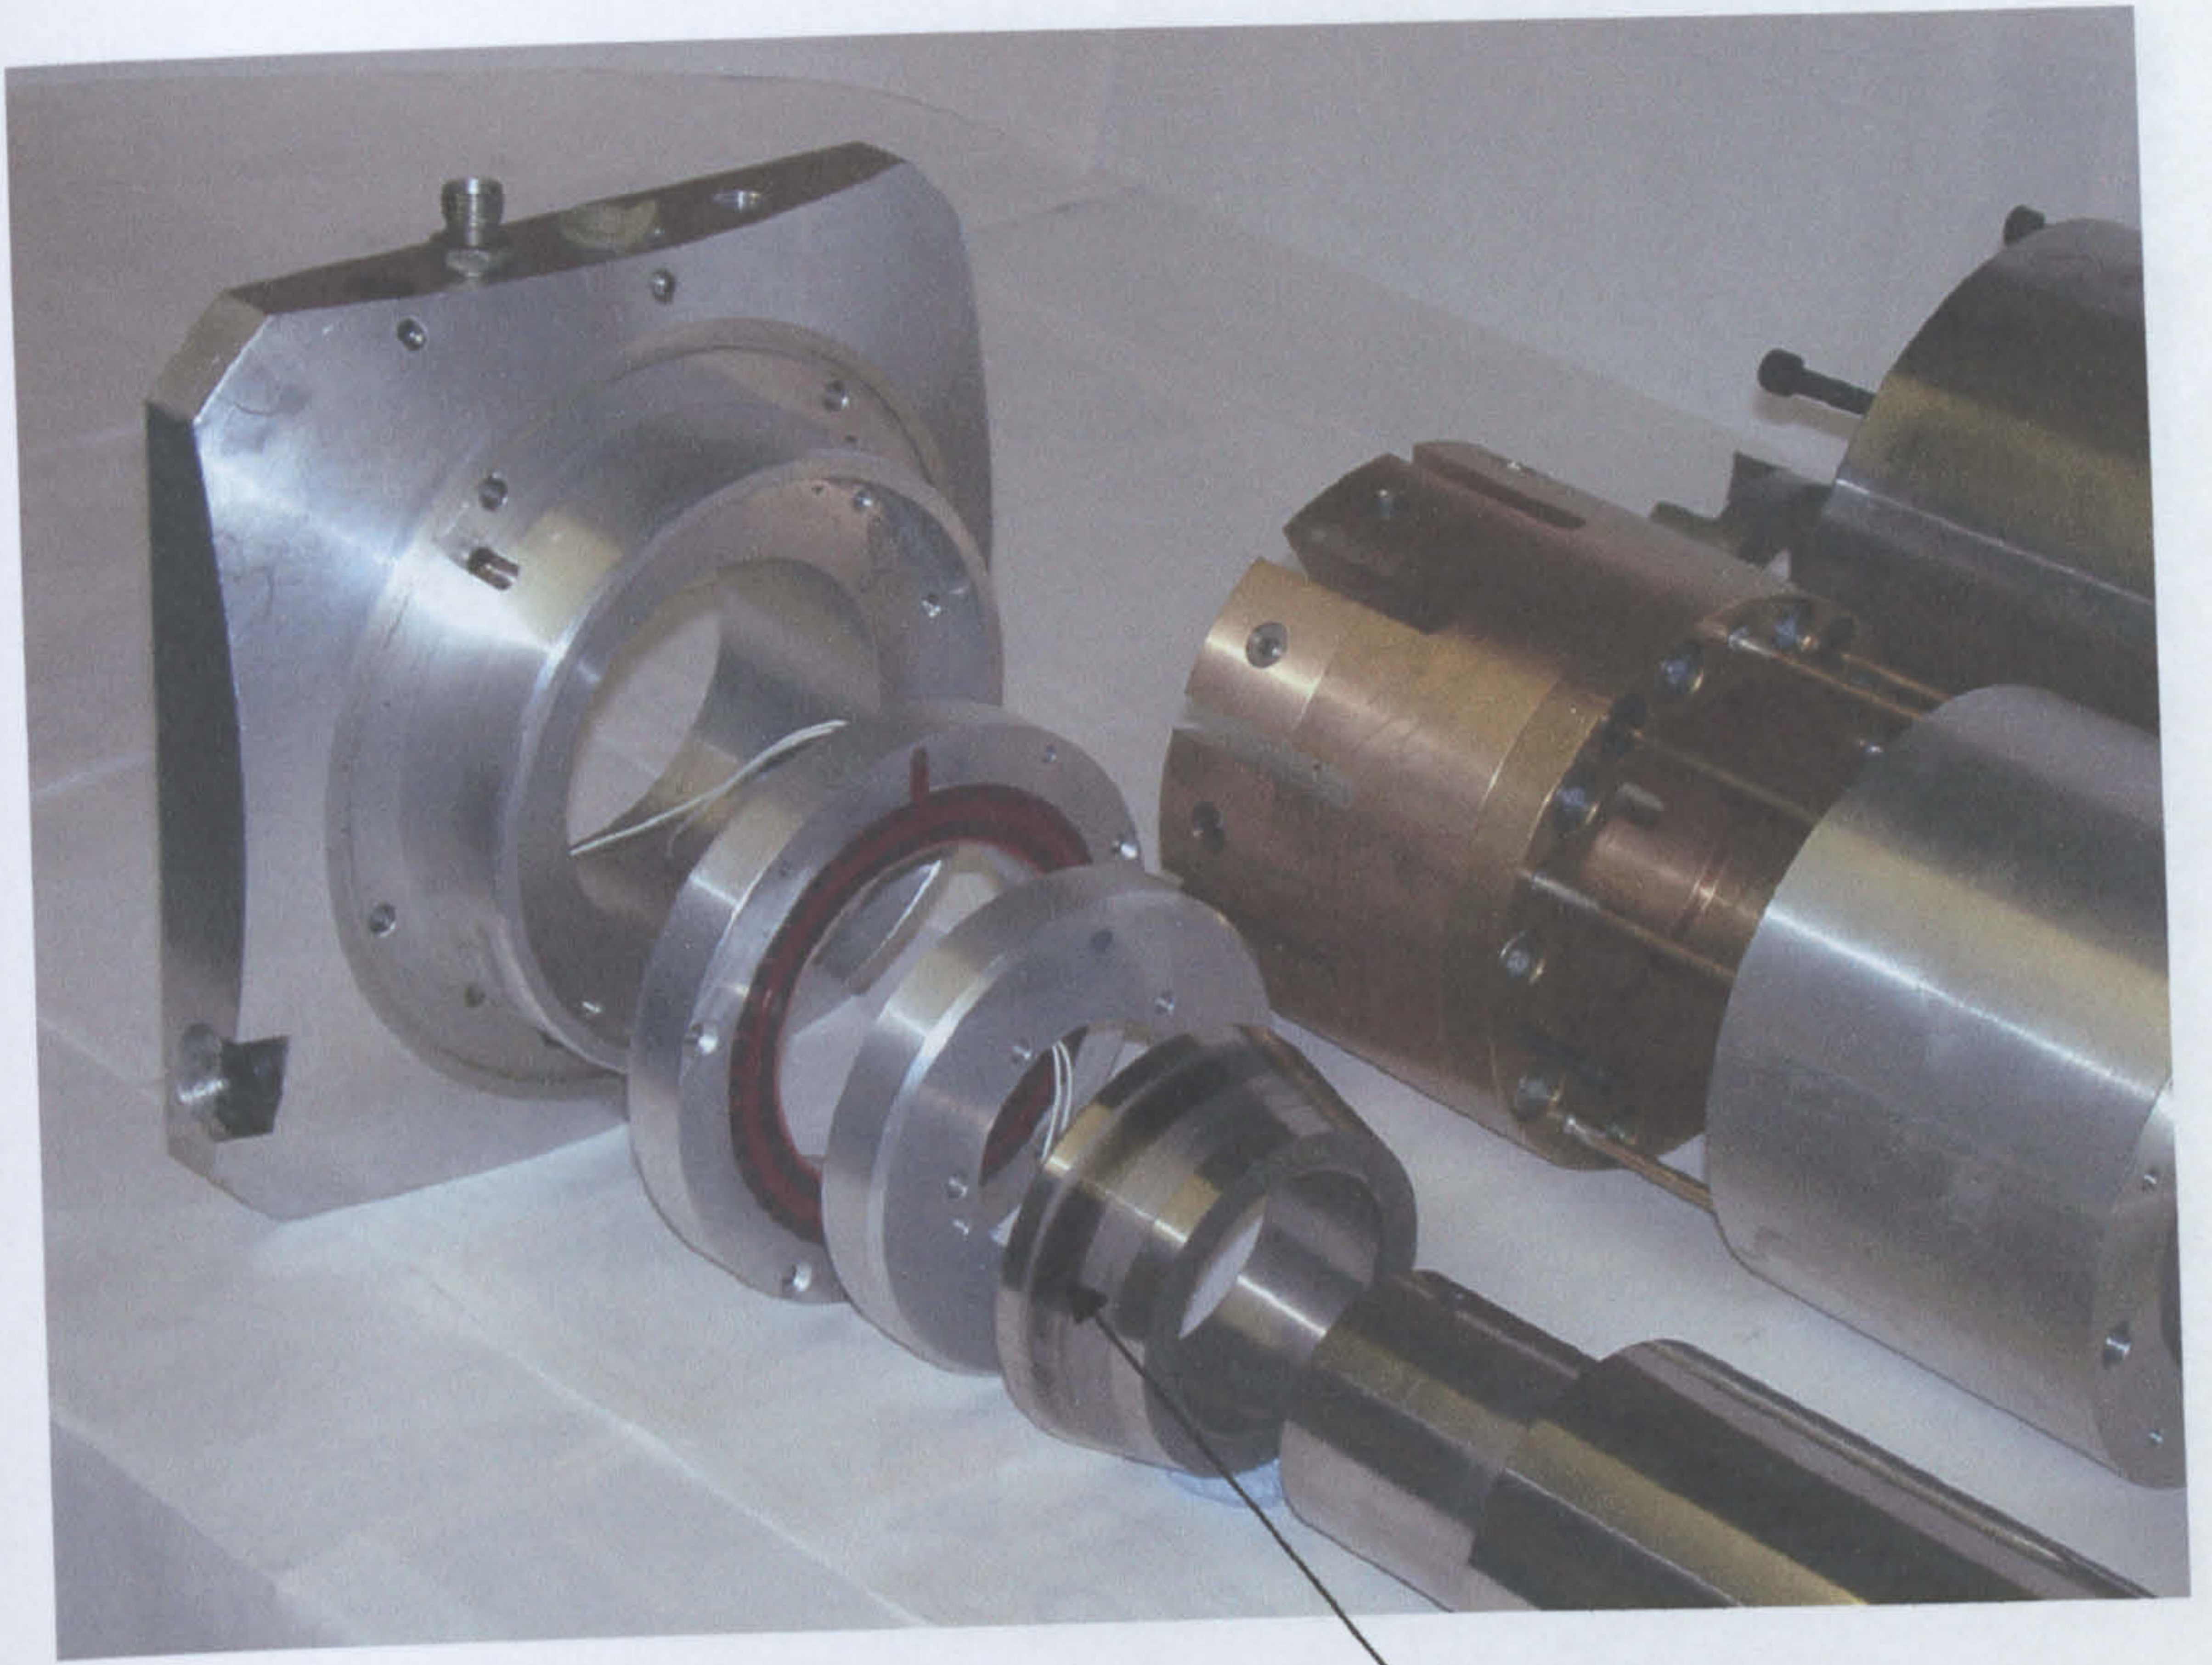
Photograph showing a close up view of rear journal of the hydrostatic bearing. Burn marks can be seen caused by contact with the bearing surface.
